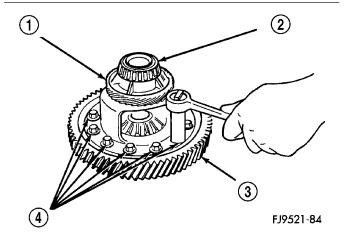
Remove Ring Gear Bolts and Ring Gear
